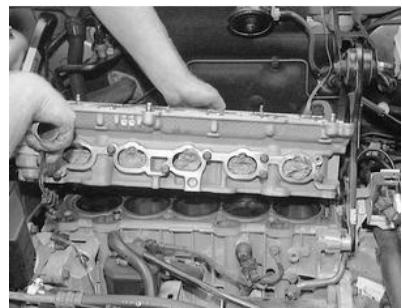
After the head is removed, inspect the block for damage, cracks, and obvious wear
